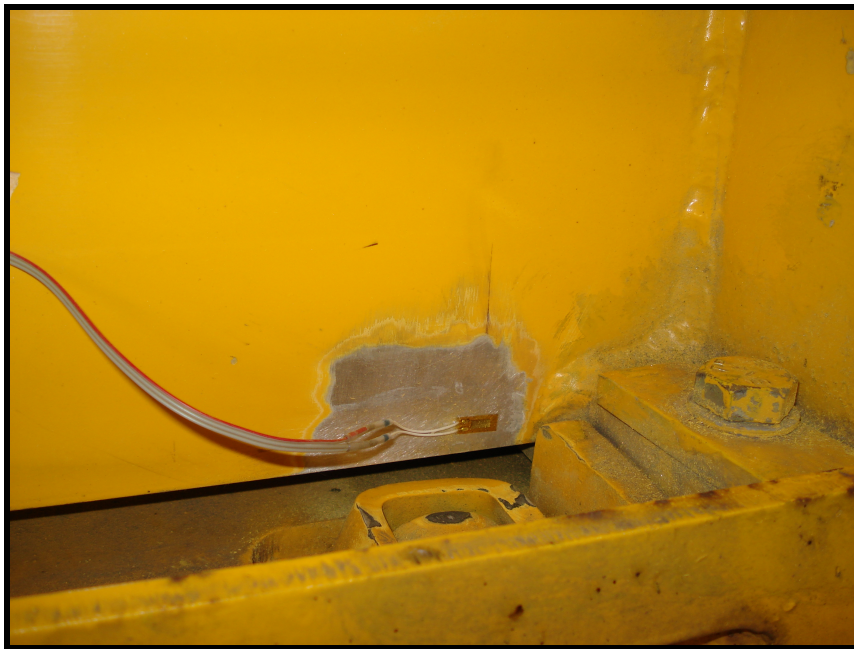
Uniaxial gauge (gauge twelve) at crack position three
